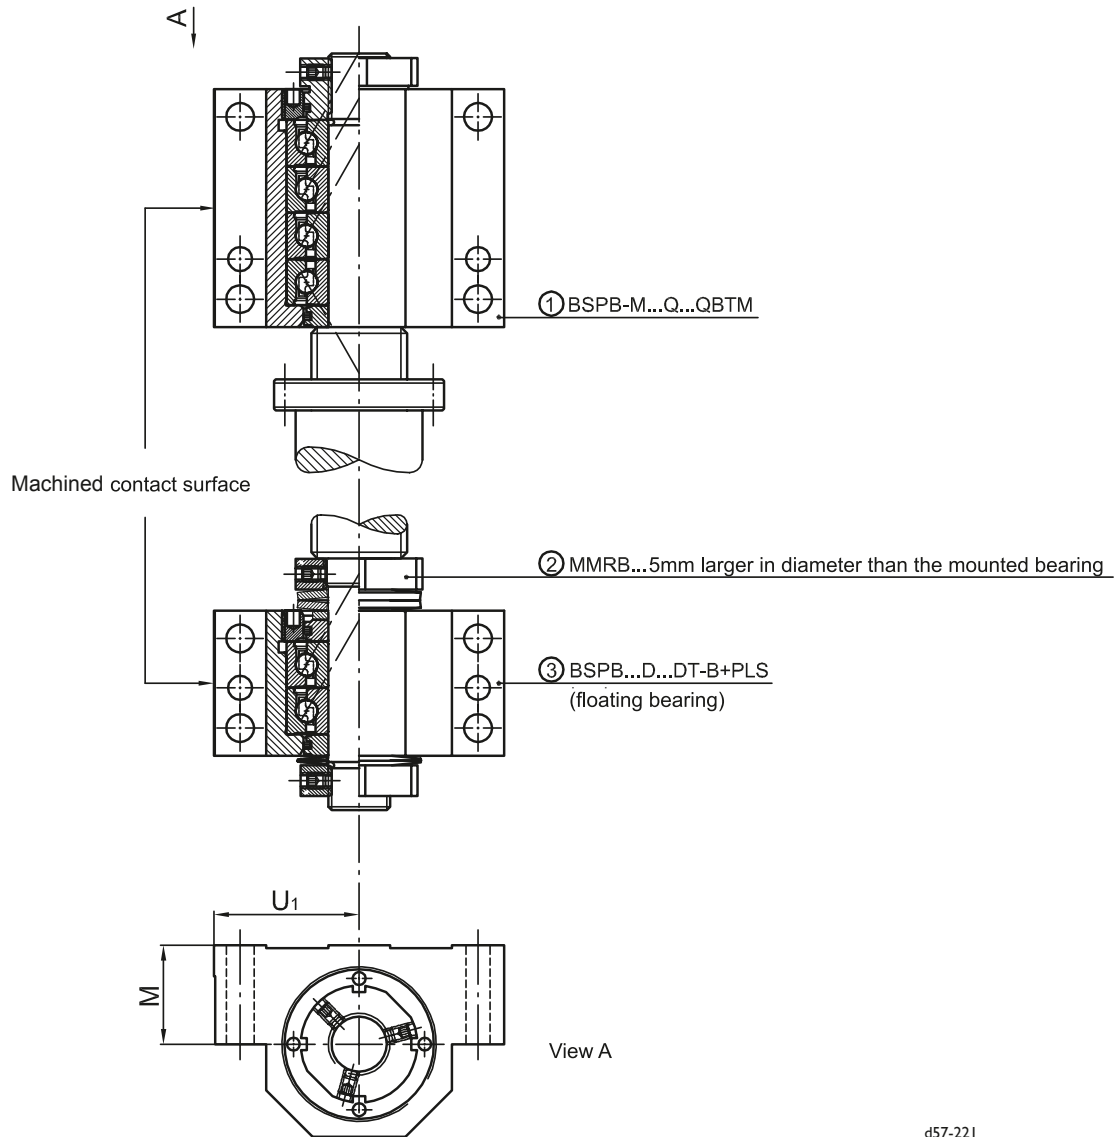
Spring-preloaded assembly with floating bearing function in the housing; Bearing sealed via labyrinth seals of the S series
